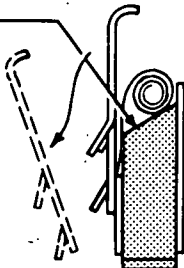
BRUSH HOLDER (5.0UF-2105)
